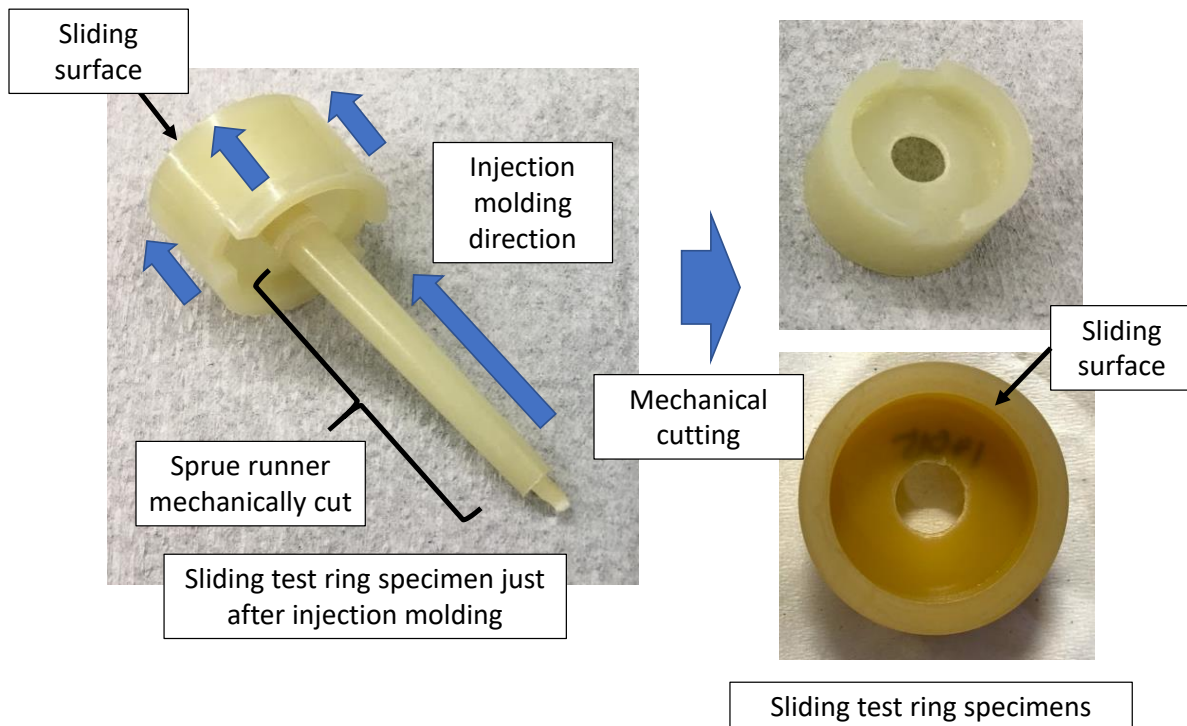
Molded sliding test ring specimen and cutting process.
